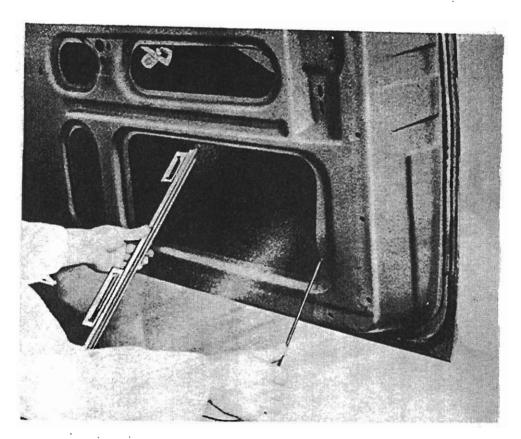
Pull the Window Glass and Lifter Assembly Out Through the Lower Access Opening In the Door Inner Panel.
